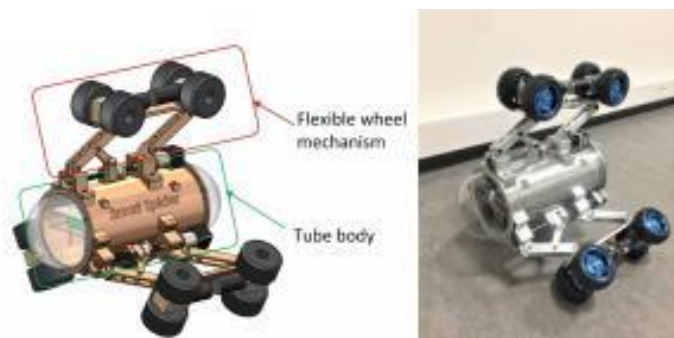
The Mechanism Structure of the Flexible Wheel Mechanism Drive in Pipe Robot
